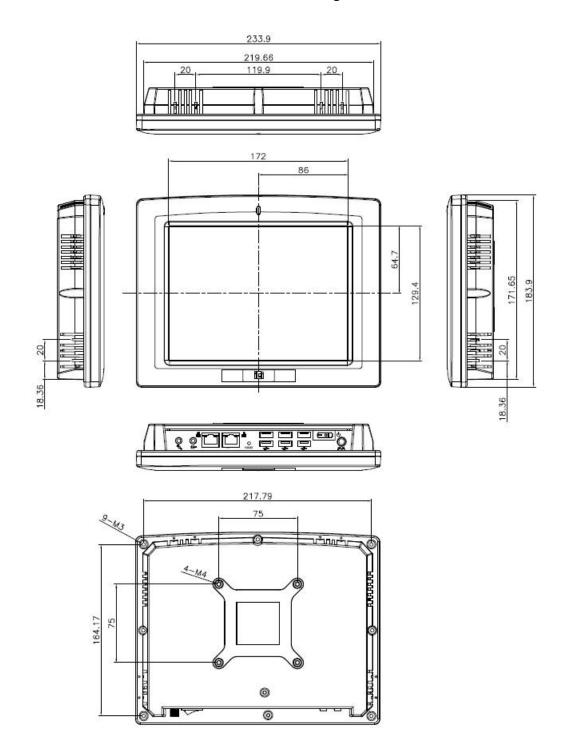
AFL-08AH-N270-CR Dimensions (mm)
